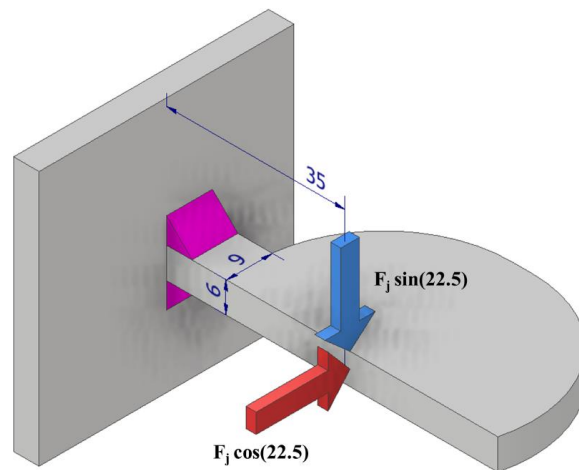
Diagram showing assumed loading and welding arrangement.
